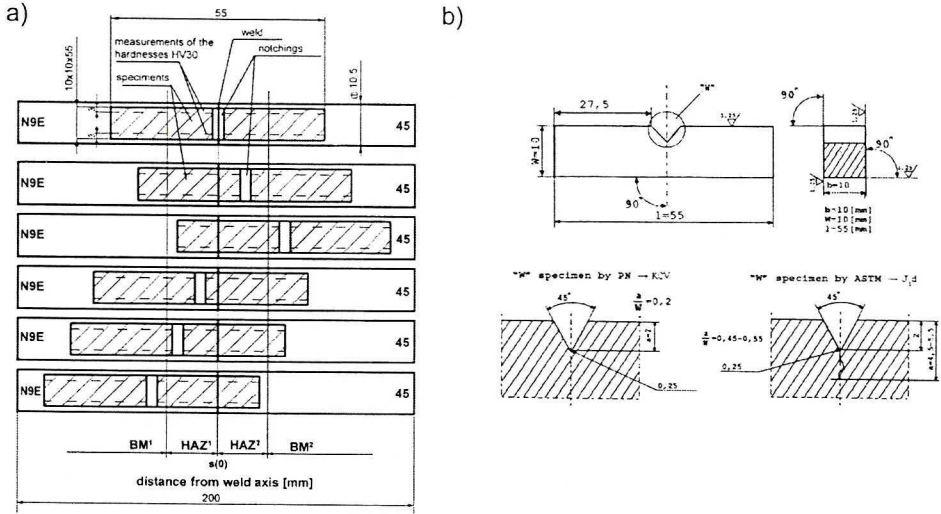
The cutting-out technique of impact resistance specimens for tests for the dynamical fracture toughness  $J_{Id}$  and the impact resistance KCV on the frictionally welded joints: a) cutting-out technique of specimens and the location of the notch, b) method of notching
